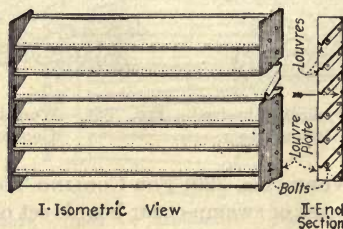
"Burhorn" Sheet-Metal Cooling-Tower Louvres.
